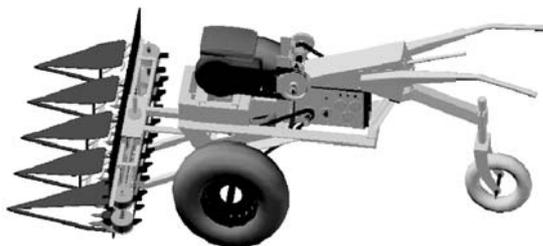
AutoCAD drawing of complete BRRRI self-propelled reaper.
